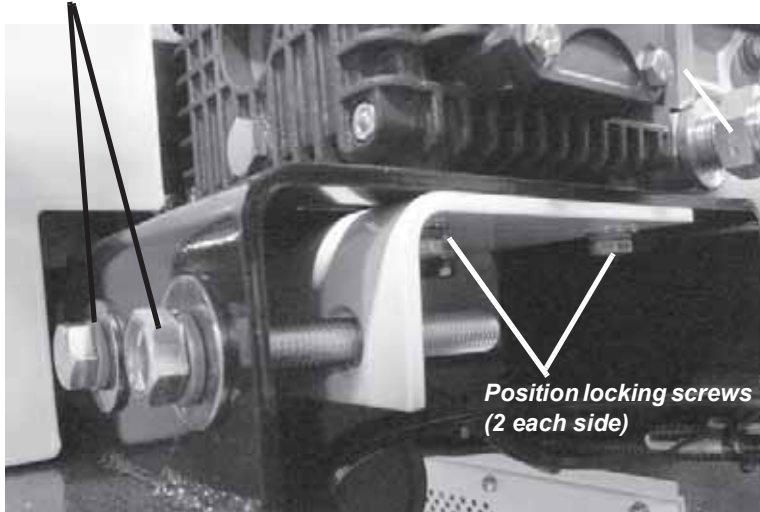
Use the tension screws on the pump mounting plate to loosen and tighten the blower belts.
